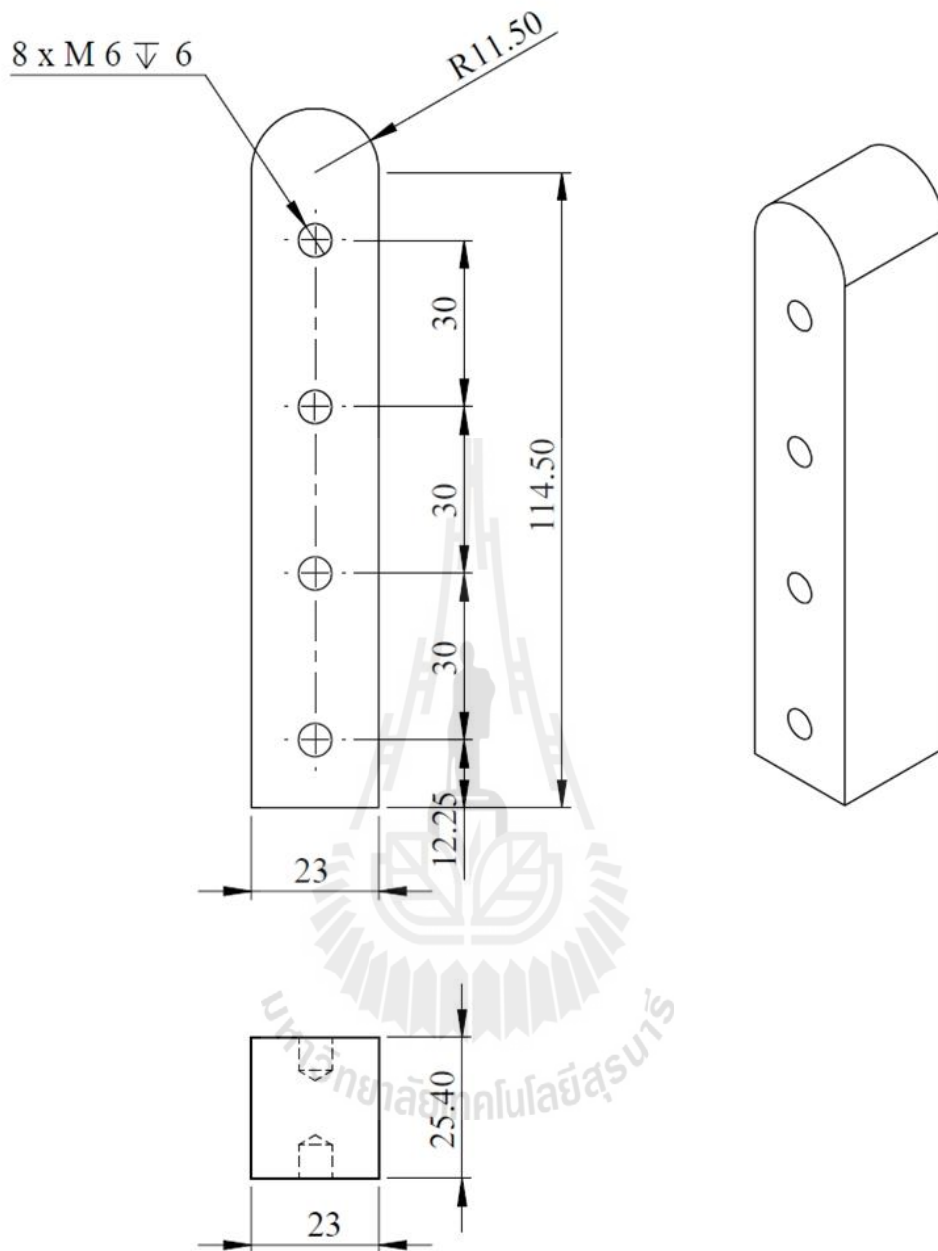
Dimensions of middle steel of loading platen in millimeter scale.
